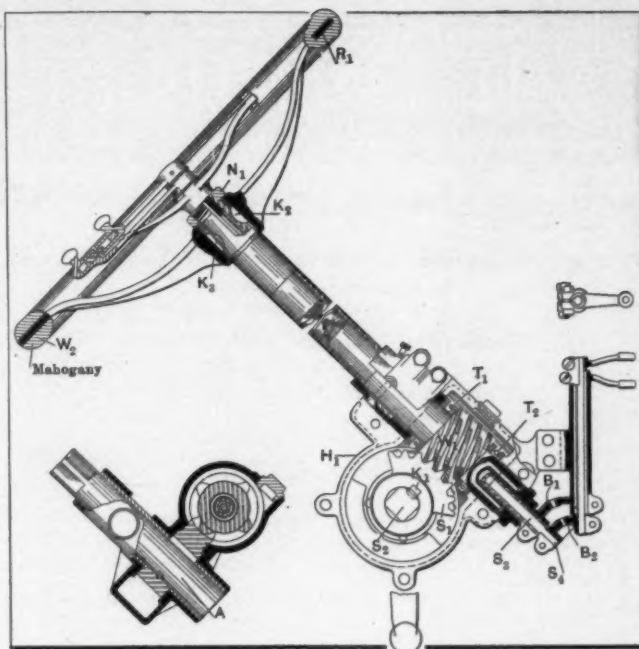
Worm-and-sector type of Gemmer gear with internally located concentrically disposed spark and throttle mechanism
